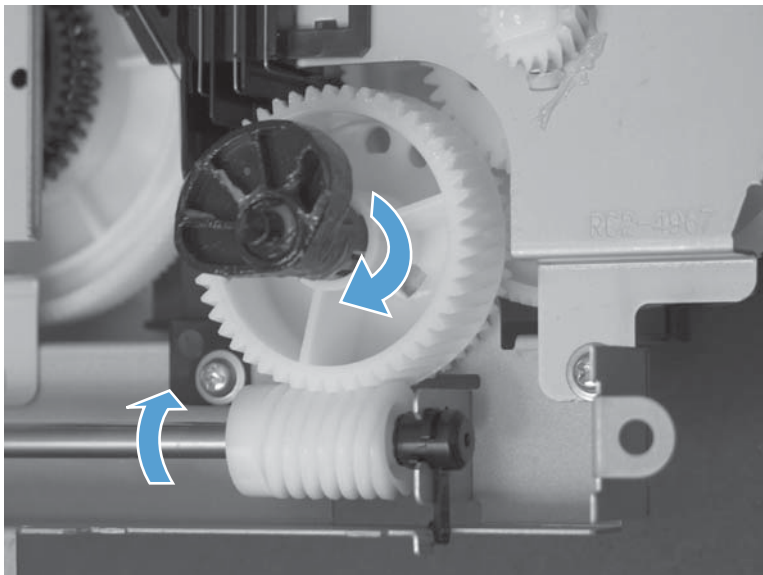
Reinstall the main-drive assembly (1 of 7)
